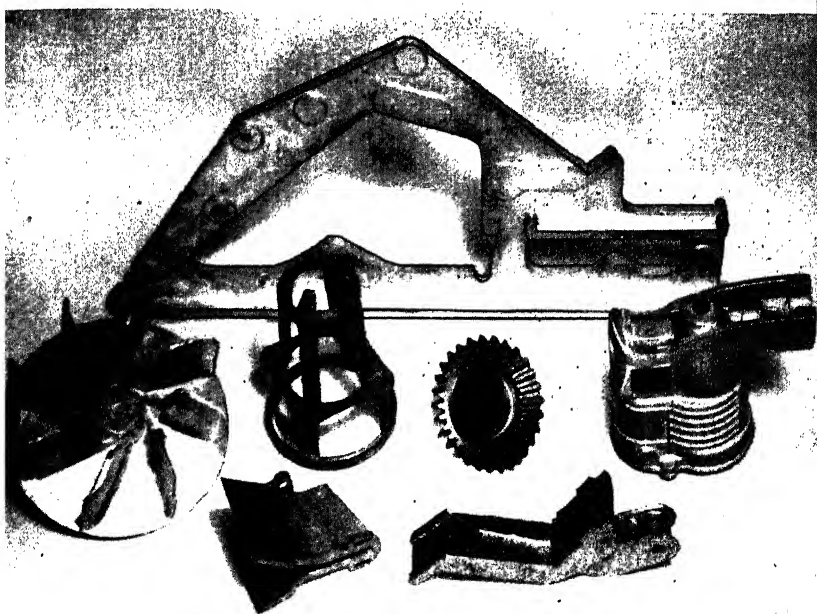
Group of gravity die-castings *Courtesy of Fry's Diecastings Ltd.
